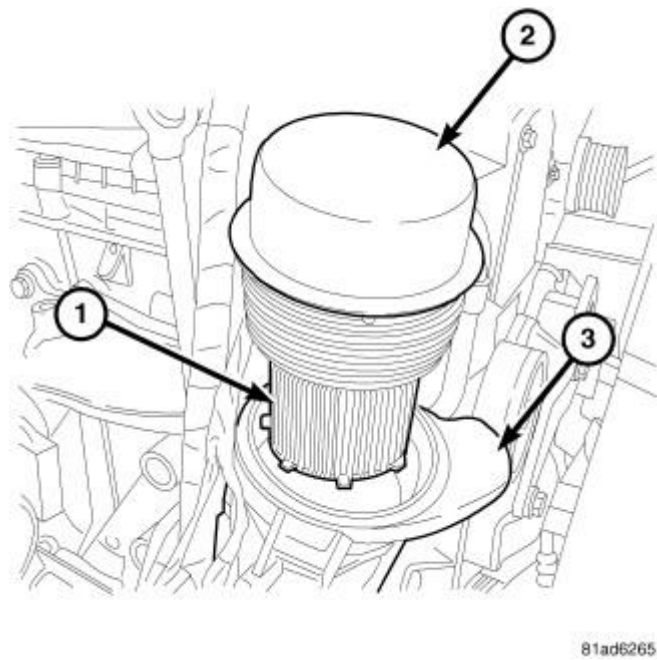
Oil Filter, Oil Filter Housing Cap & Oil Filter Housing
